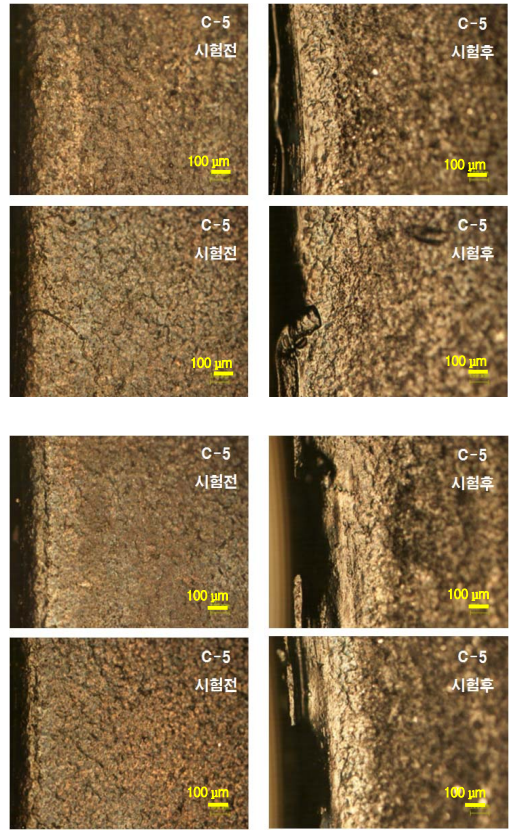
Microscopic photographs of check valve seals affected by oil immersion before and after extreme chattering test.
